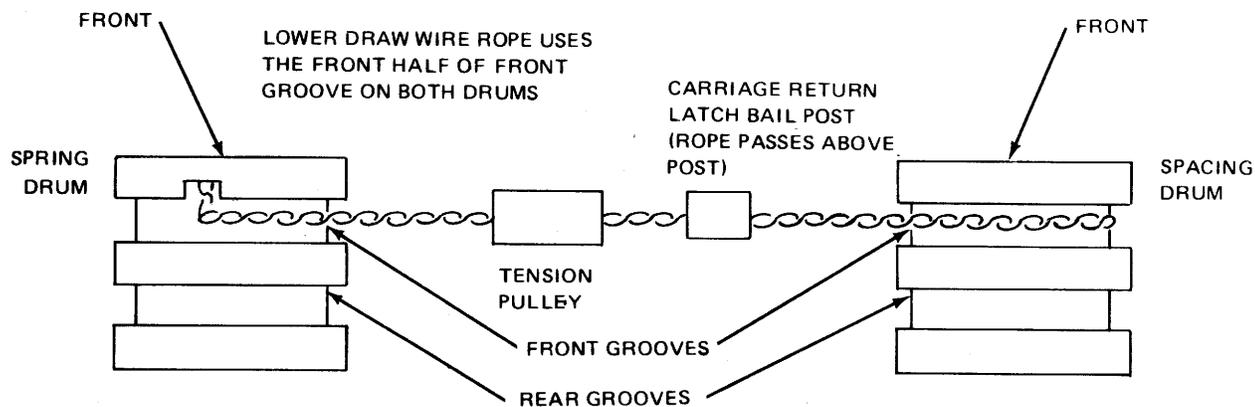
Lower Draw Wire Rope Route (Bottom View).
